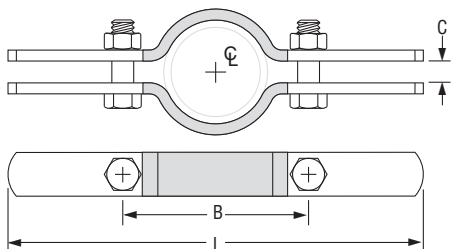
Loads (lbs) • Weight (lbs) • Dimensions (in)
